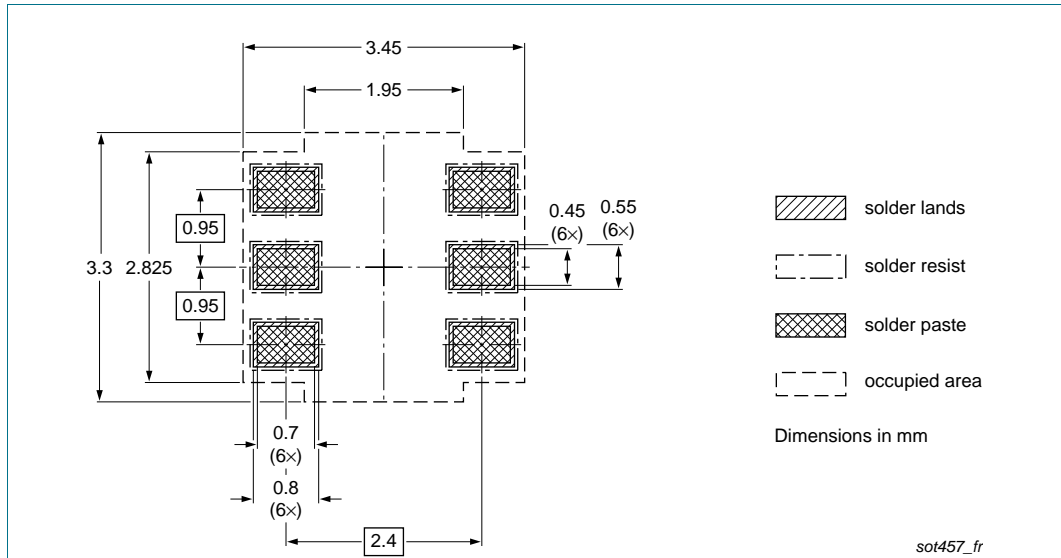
Reflow soldering footprint PIMD2 (SOT457)
